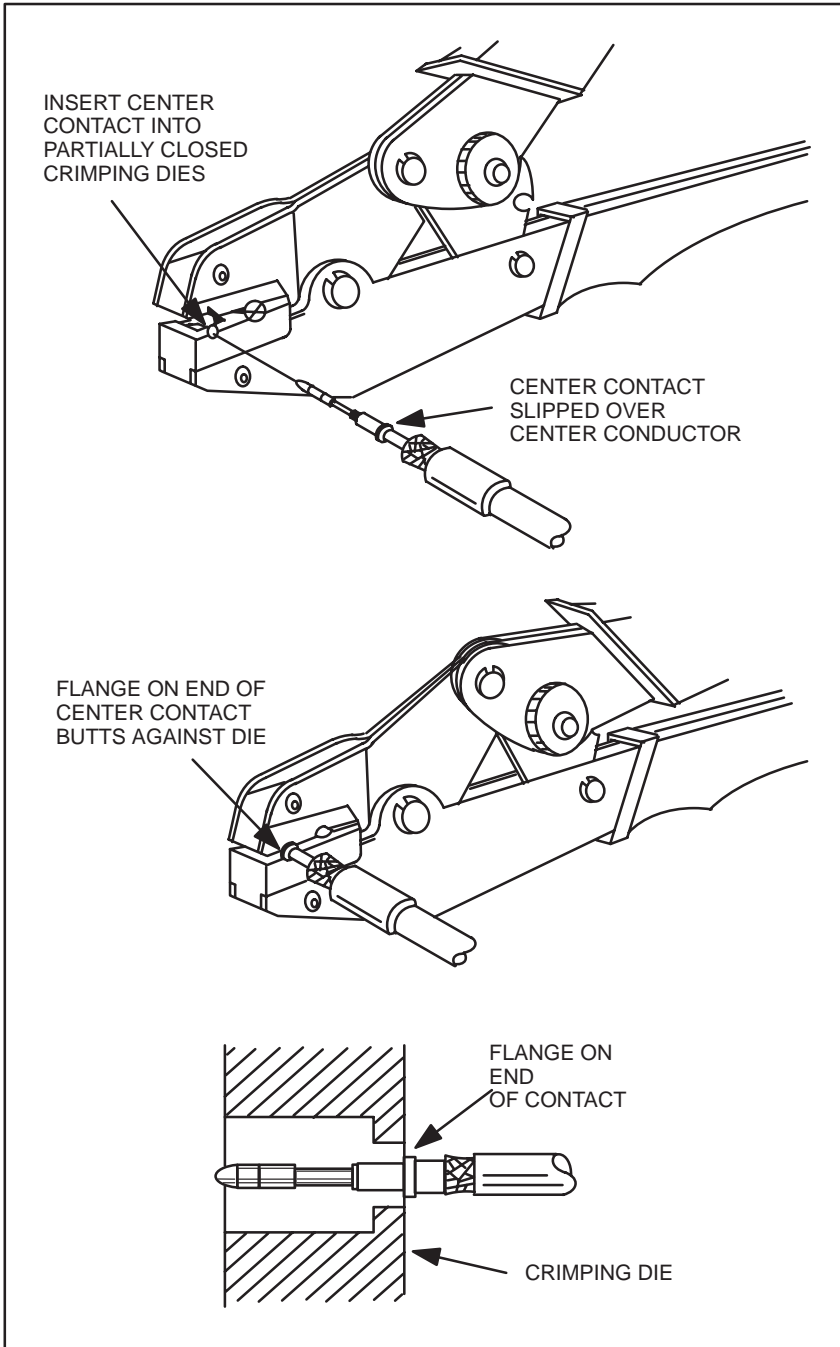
Connector Installation Step 3 for RG-59/U Cable
